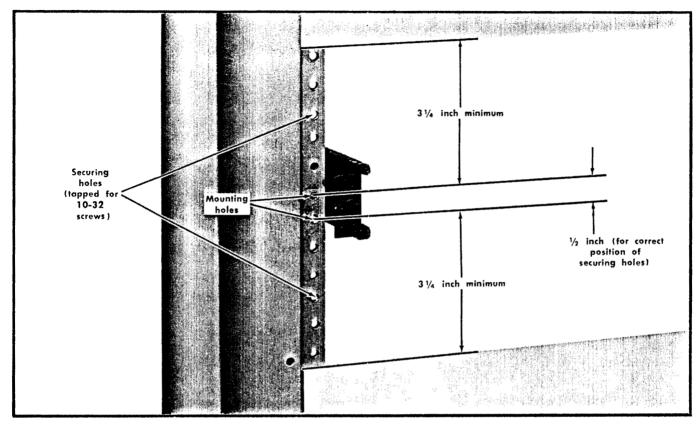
Locating the mounting holes for the left stationary section. Same dimensions apply to right stationary section.
